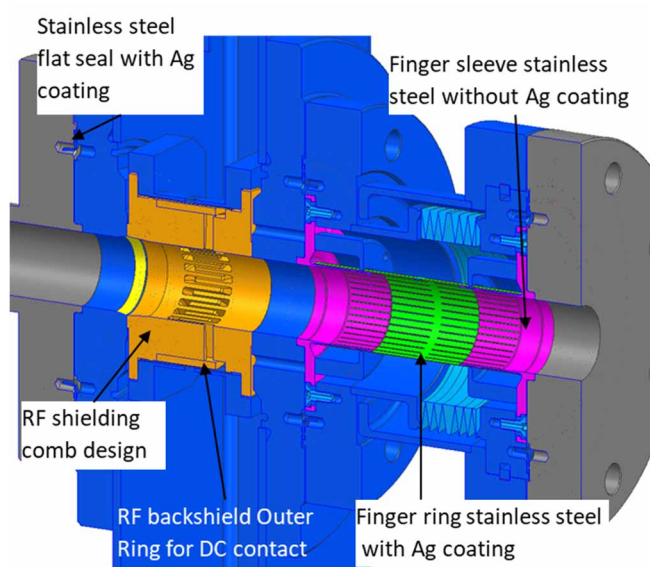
3D Cross-section view of the inner part of a valve (left) – bellow (right) assembly.
